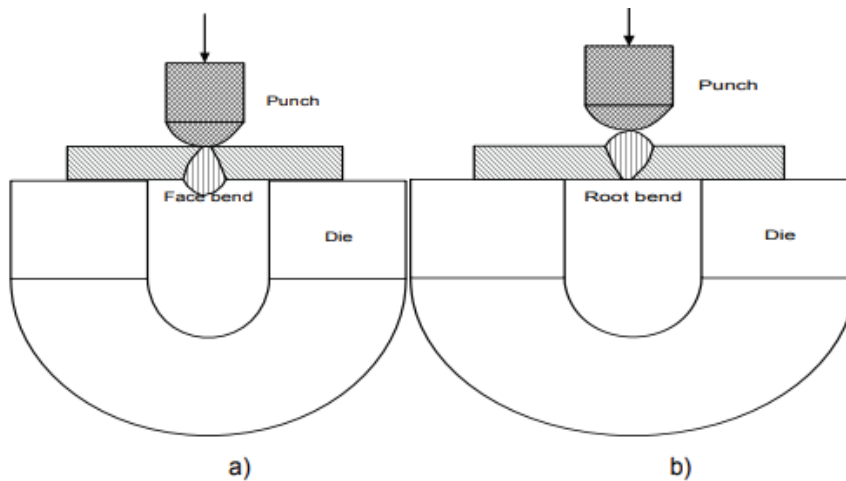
4 : Schematics of guided bend tests a) face bend and b) root bend
